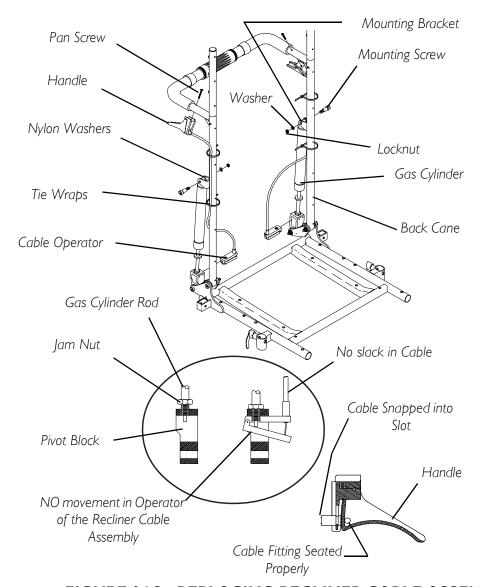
REPLACING RECLINER CABLE ASSEMBLIES
